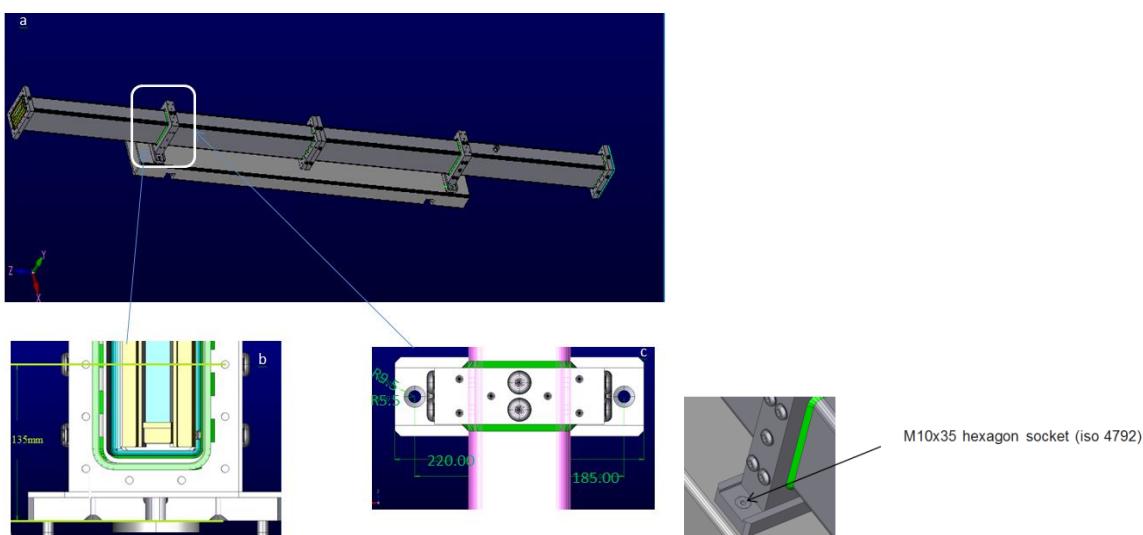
a : 4m guide assembly ; b : The height from the center of the guide down to the bottom surface which would be bolted to the neutron optics exchanger; c: dimensions of the fixtures.
